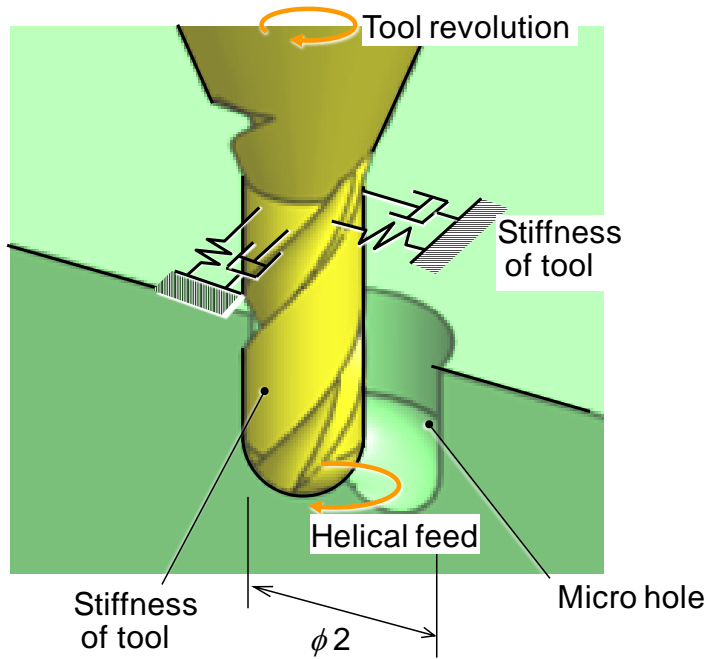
9 Helical milling of a hole with a ball end mill.
